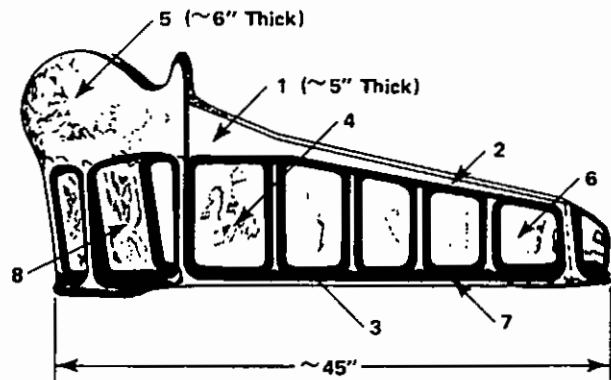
WING SWEEP ACTUATOR VIM-VAR FORGING SHOWING CRITICAL TEST LOCATIONS AND MECHANICAL TEST SPECIMENS CUT FROM THESE AREAS (11) P. 15
